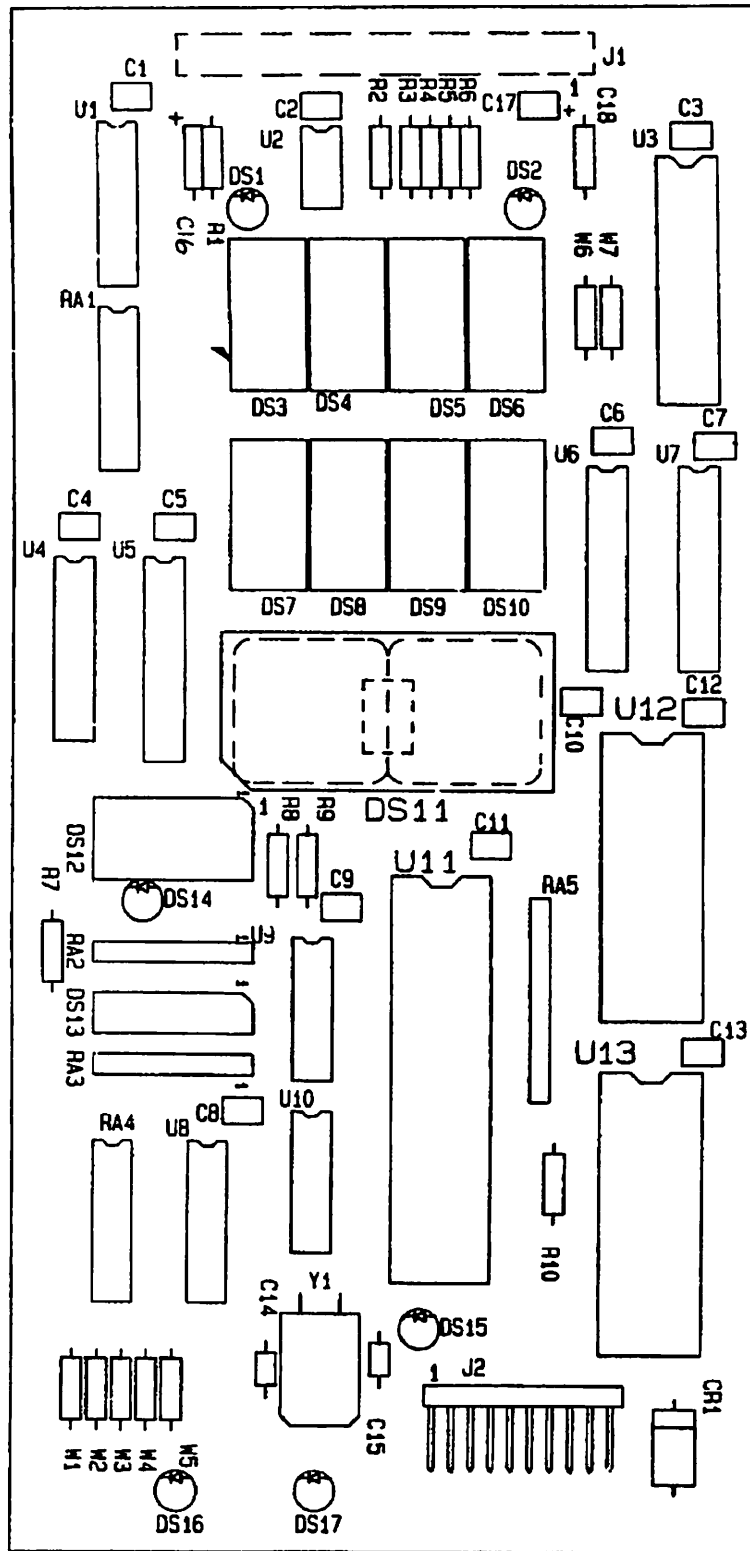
Parts Identification Display Circuit Card Assembly [v7.xx]
